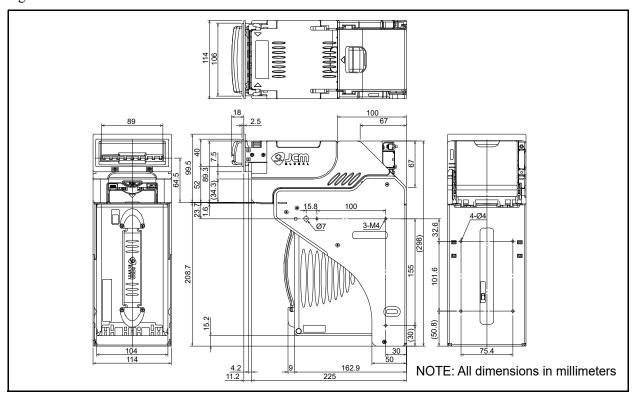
iVIZION SS Unit with Standard Cash Box/Metal Bezel Outside Dimensions
